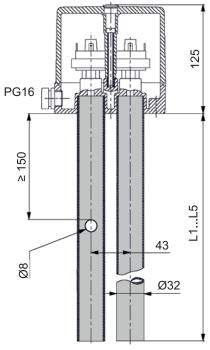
Dimensions B PVC-U = 105 PP = 103.5
